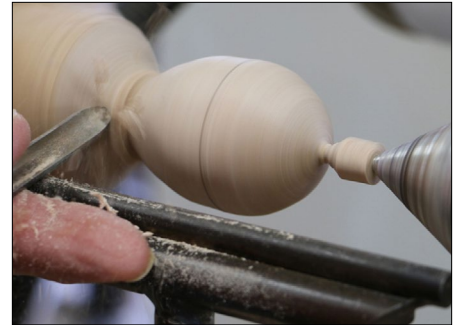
Make a relief cut - cutting away wood on the headstock side of the blank so that you can get the spindle gouge around the end of the egg.
